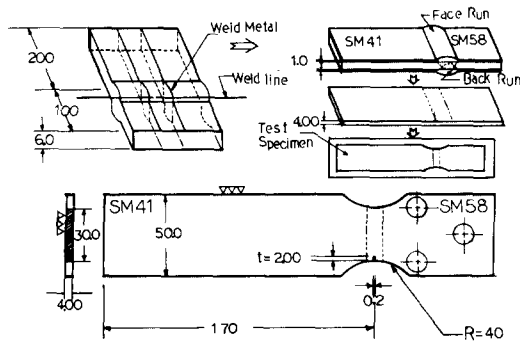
Dimensions of Test Specimen (Unit:mm)
